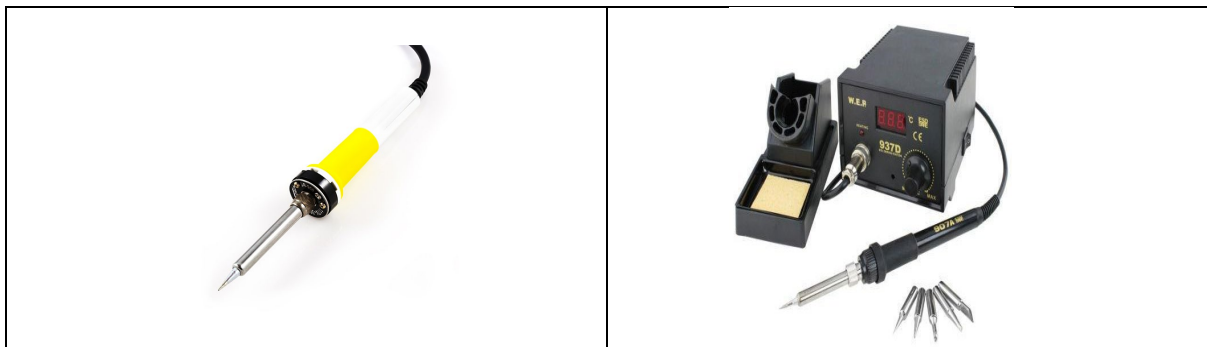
Low-Cost Soldering Iron (Left), Soldering Iron with Temperature Control (Right)
